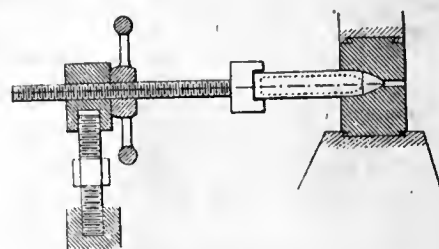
FORMING OGIVAL HEAD WITH POWER HAMMER.
